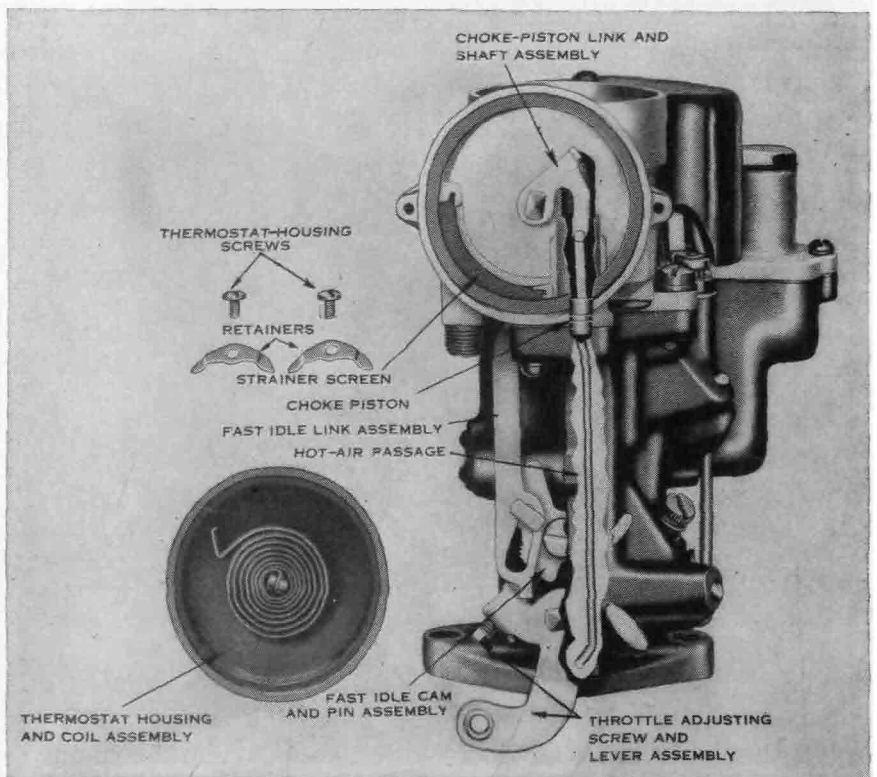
Carter climate-control automatic choke. The vacuum-choke piston is connected through a vacuum channel to the intake manifold, while the thermostat housing receives heat through a hot-air passage from the exhaust manifold. (Oldsmobile Division of General Motors Corporation)
